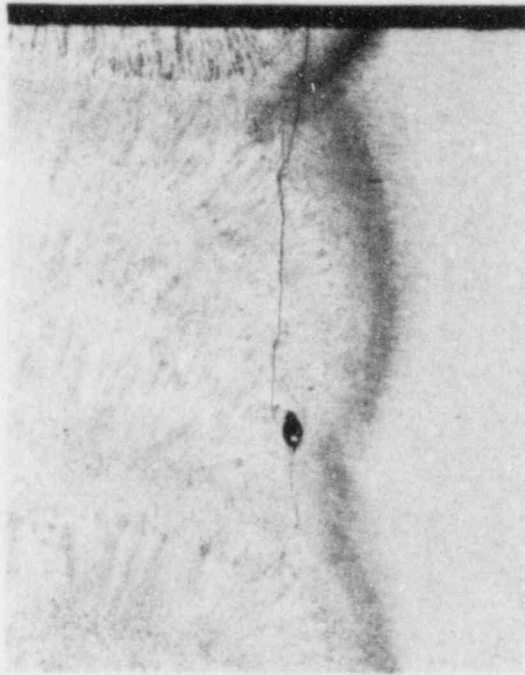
Metallographic Section from Core B2. Crack is parallel to the longitudinal weld and is about 0.49 in. deep.
